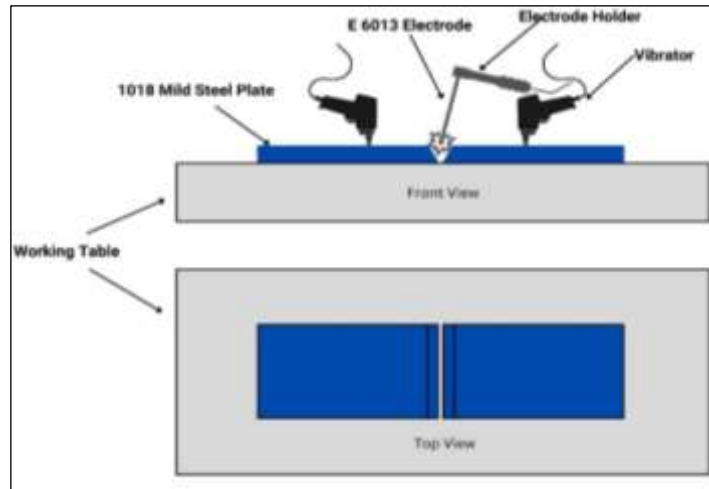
Experimental Setup for Vibration-Assisted Welding of 1018 Mild Steel Plates.
